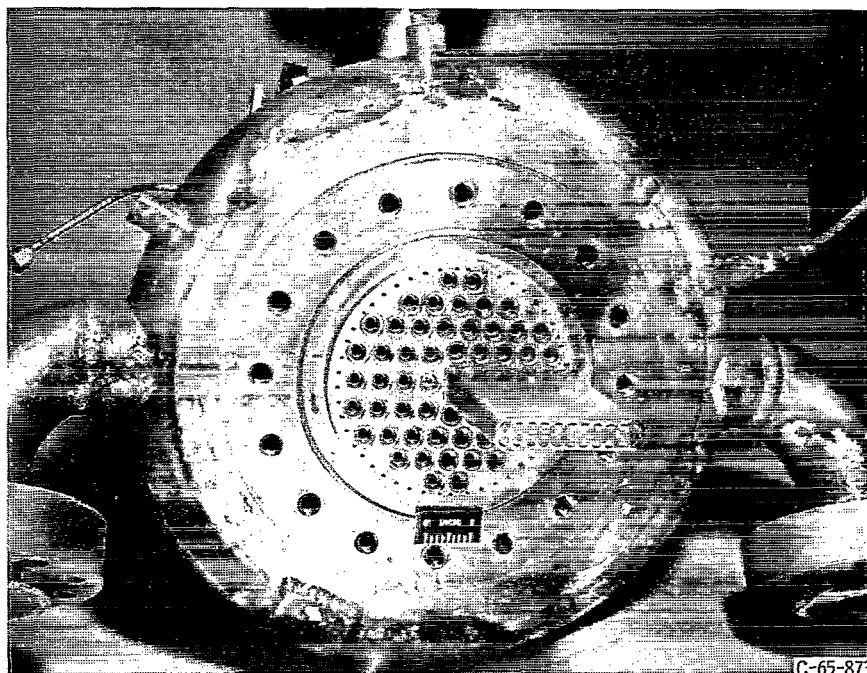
View of injector with convectively-cooled baffle specimen installed.
